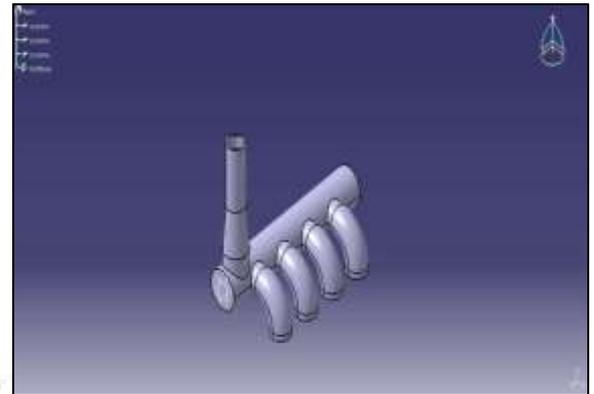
Geometry of Short Bend Side Exit with Reducer
